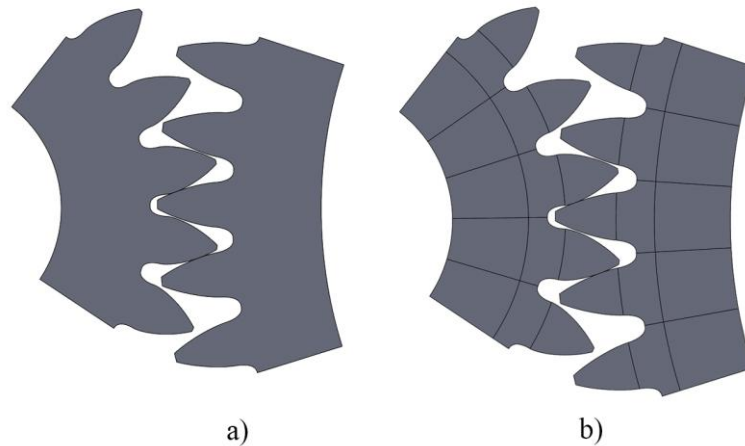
a) The original 2D model of the HCR gears, b) 2D model of a gear with HCR gearing with each tooth divided into separate elements.
